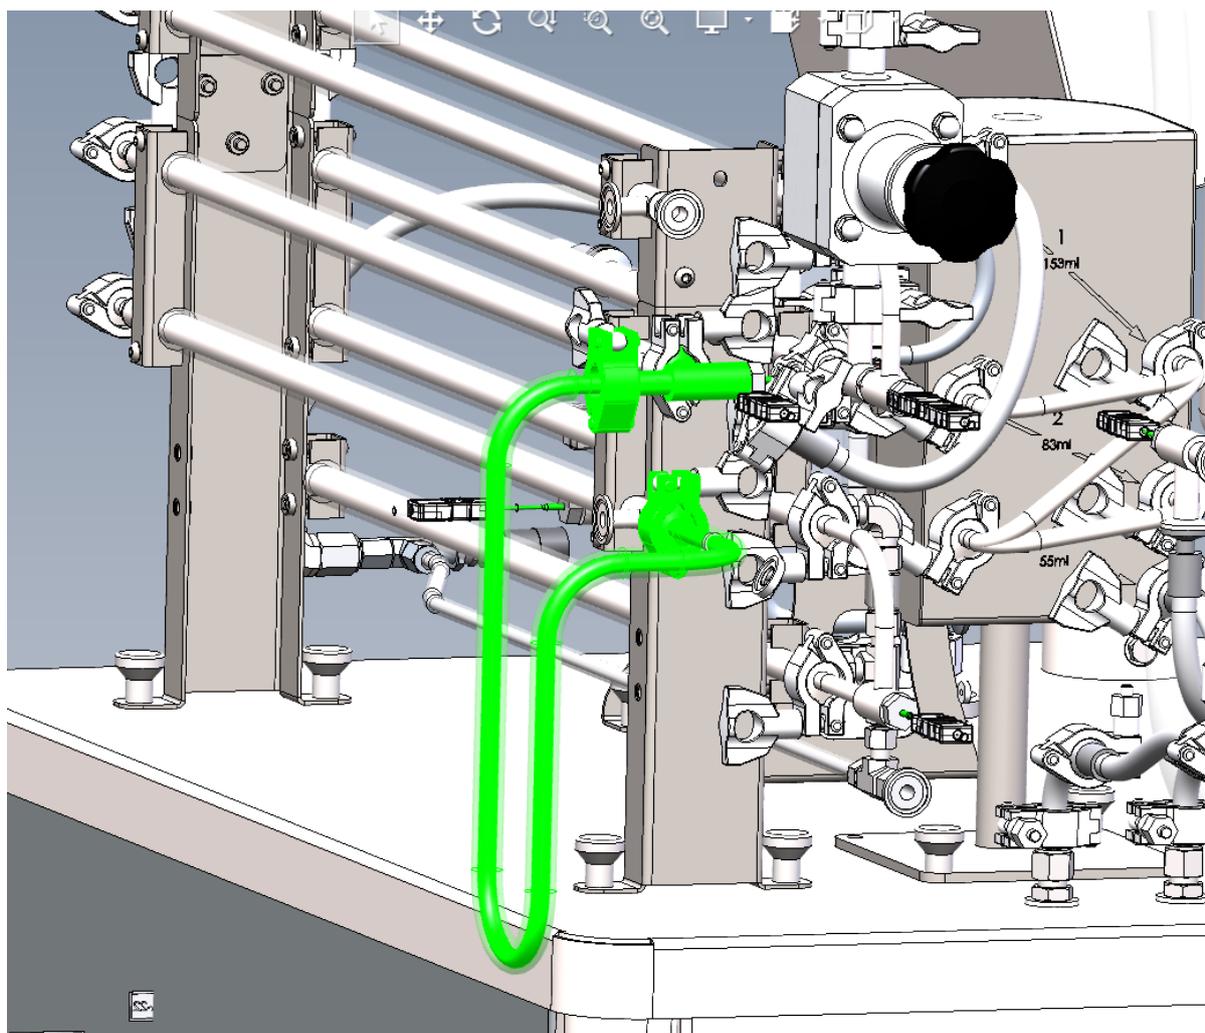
Tubular heat exchanger fitted with 15s holding tube (shown in green)
